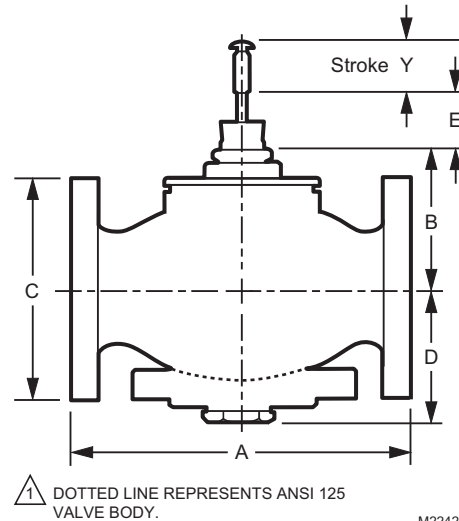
Dimensions for two-way models in inches (mm) (See Table 4).
